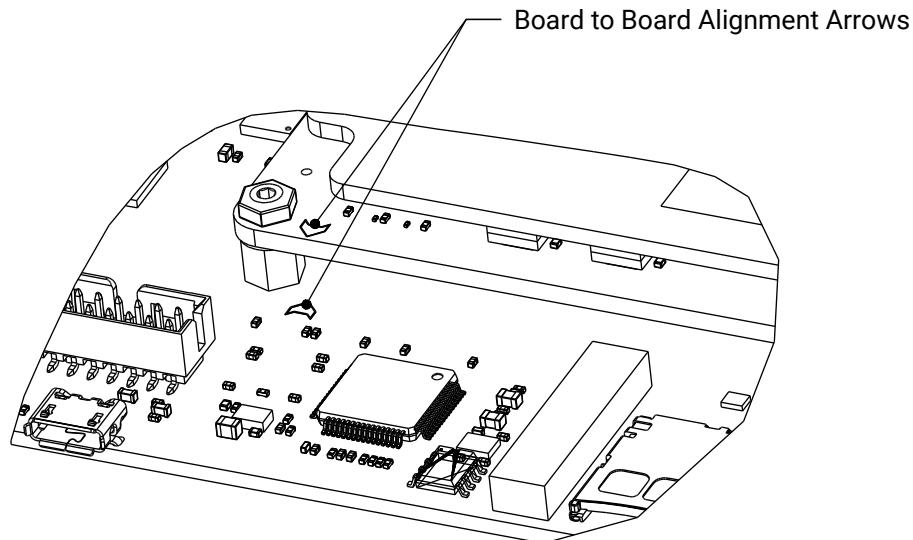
K26 SOM B2B Assembly with Samtec JSOM Standoffs
